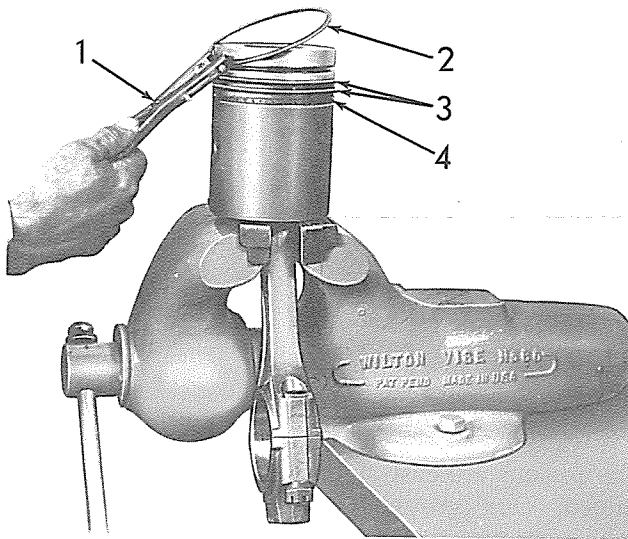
Removing Piston Rings from Piston (T-27632)
